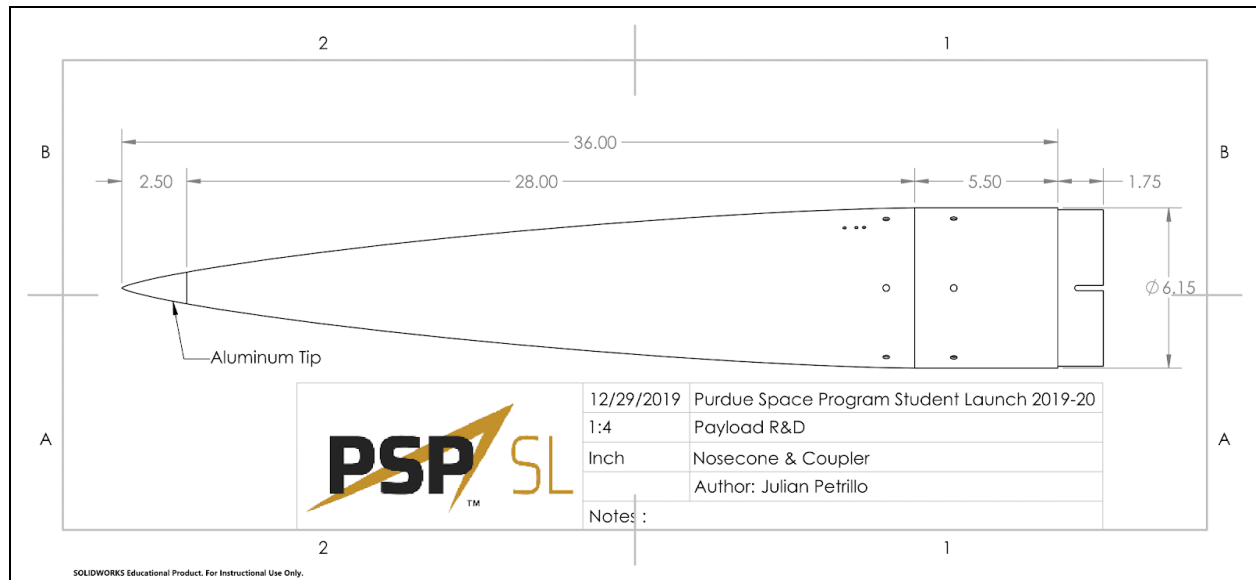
Nose Cone and Payload Coupler Dimensional Drawing
